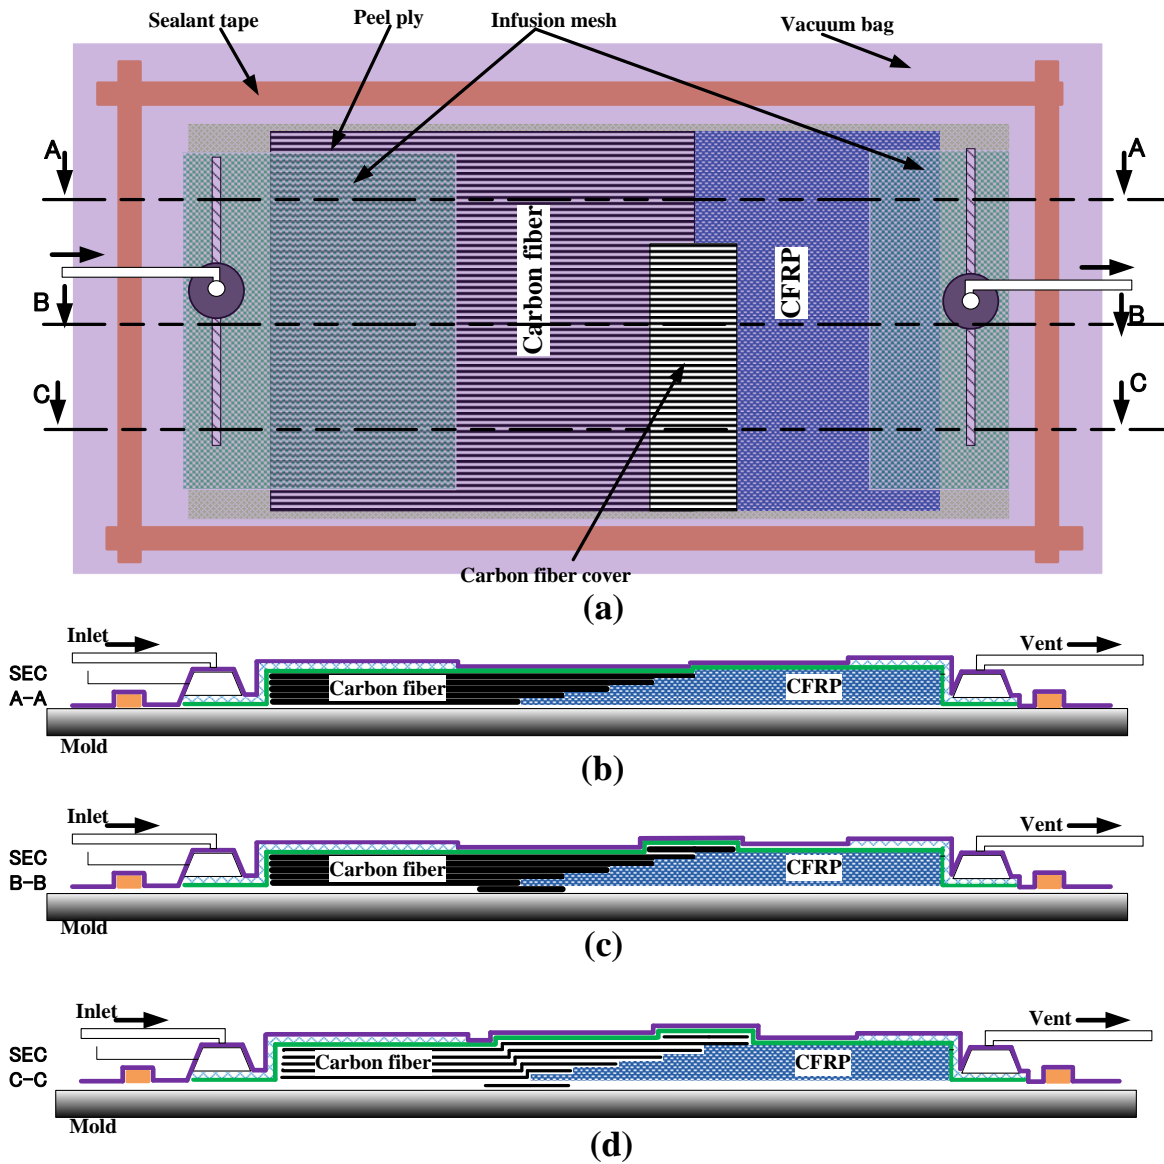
(a) Schematic view of the joints. (b) Sectional side view of the original staircase joint. (c) Sectional side view of the staircase joint with covers. (d) Sectional side view of the overlapped staircase joint
